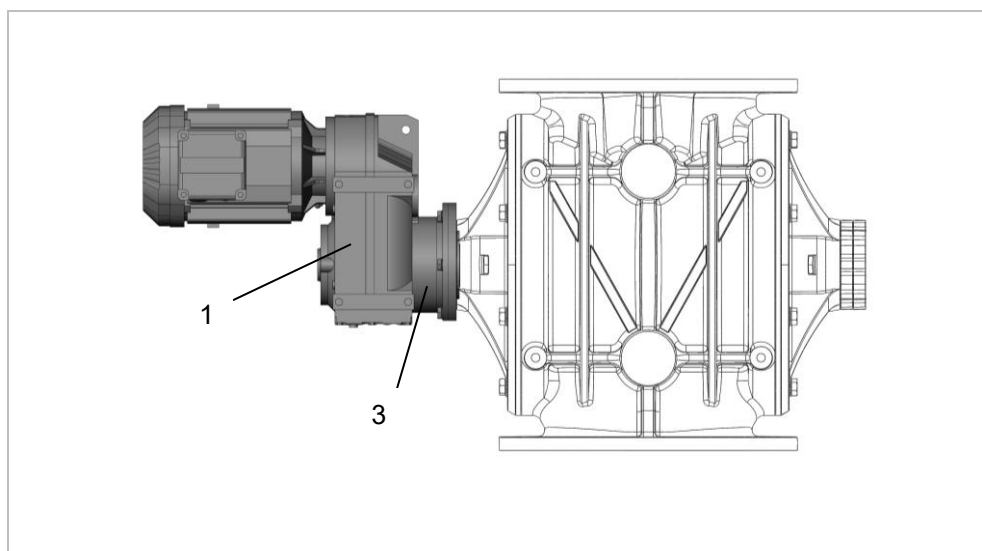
Direct drive on .2/.3 design (flange drive [3])
